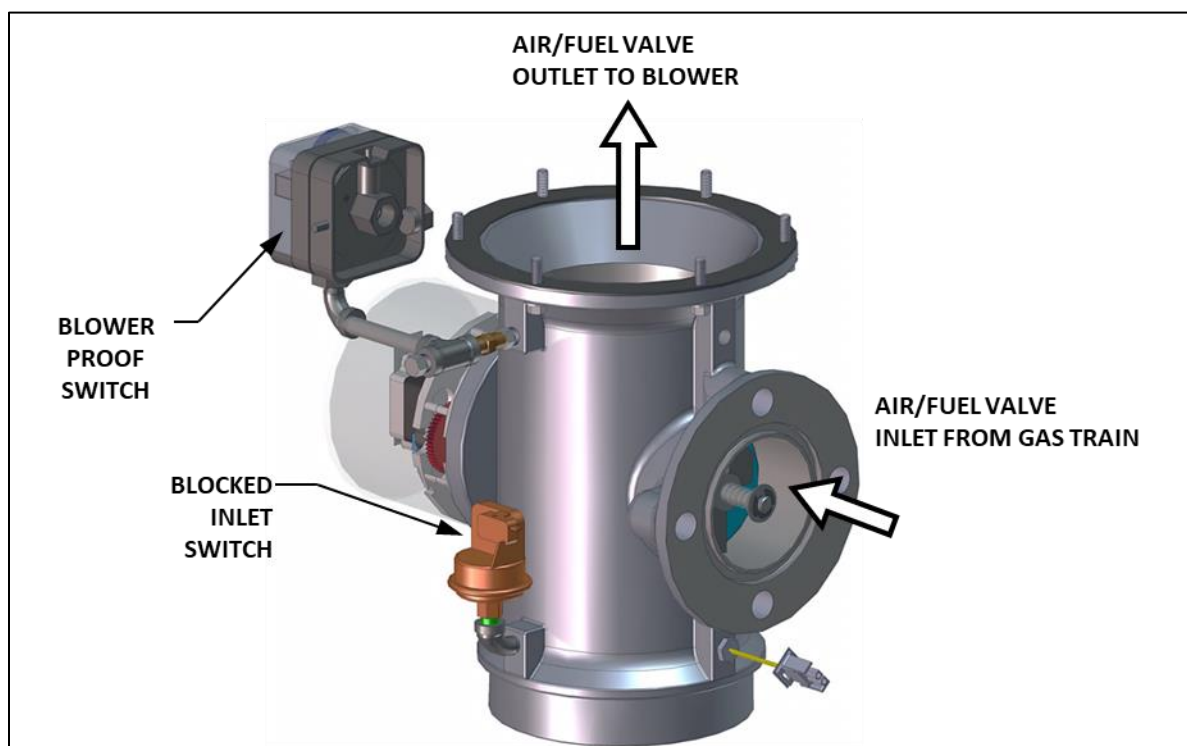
Blower Proof Switch and Blocked Inlet Switch
